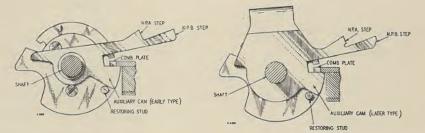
LEVEL-SPRING AUXILIARY CAM
